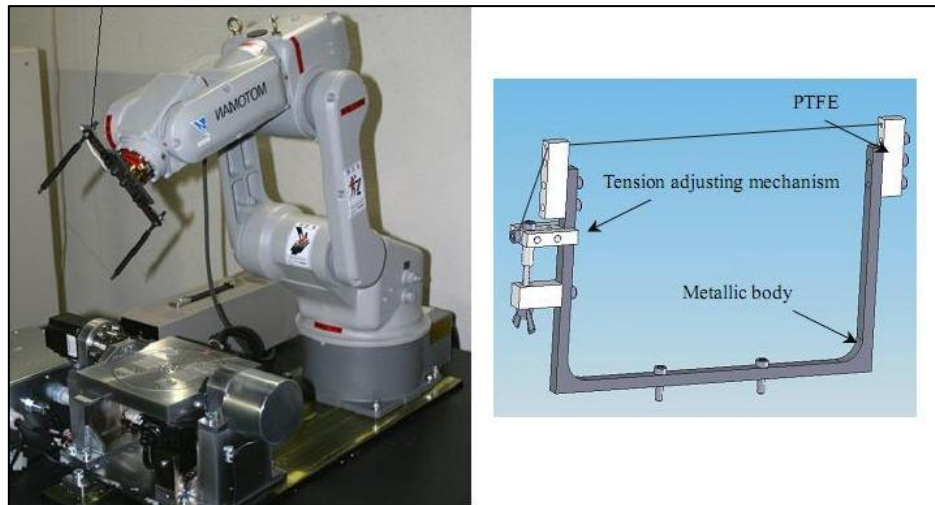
Michelangelo equipment setup, showing 2-axis worktable (left) and hot-wire cutting tool (right)
